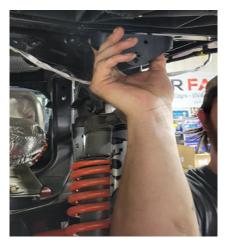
Use a 15mm Socket to remove FIG 3 - Remove O-Ring from Pivot Shaft OEM Pivot Brackets
